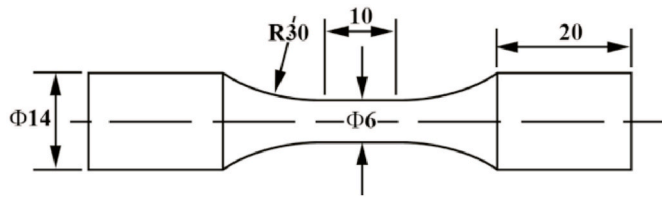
The drawing of the fatigue sample (all dimensions in mm).
